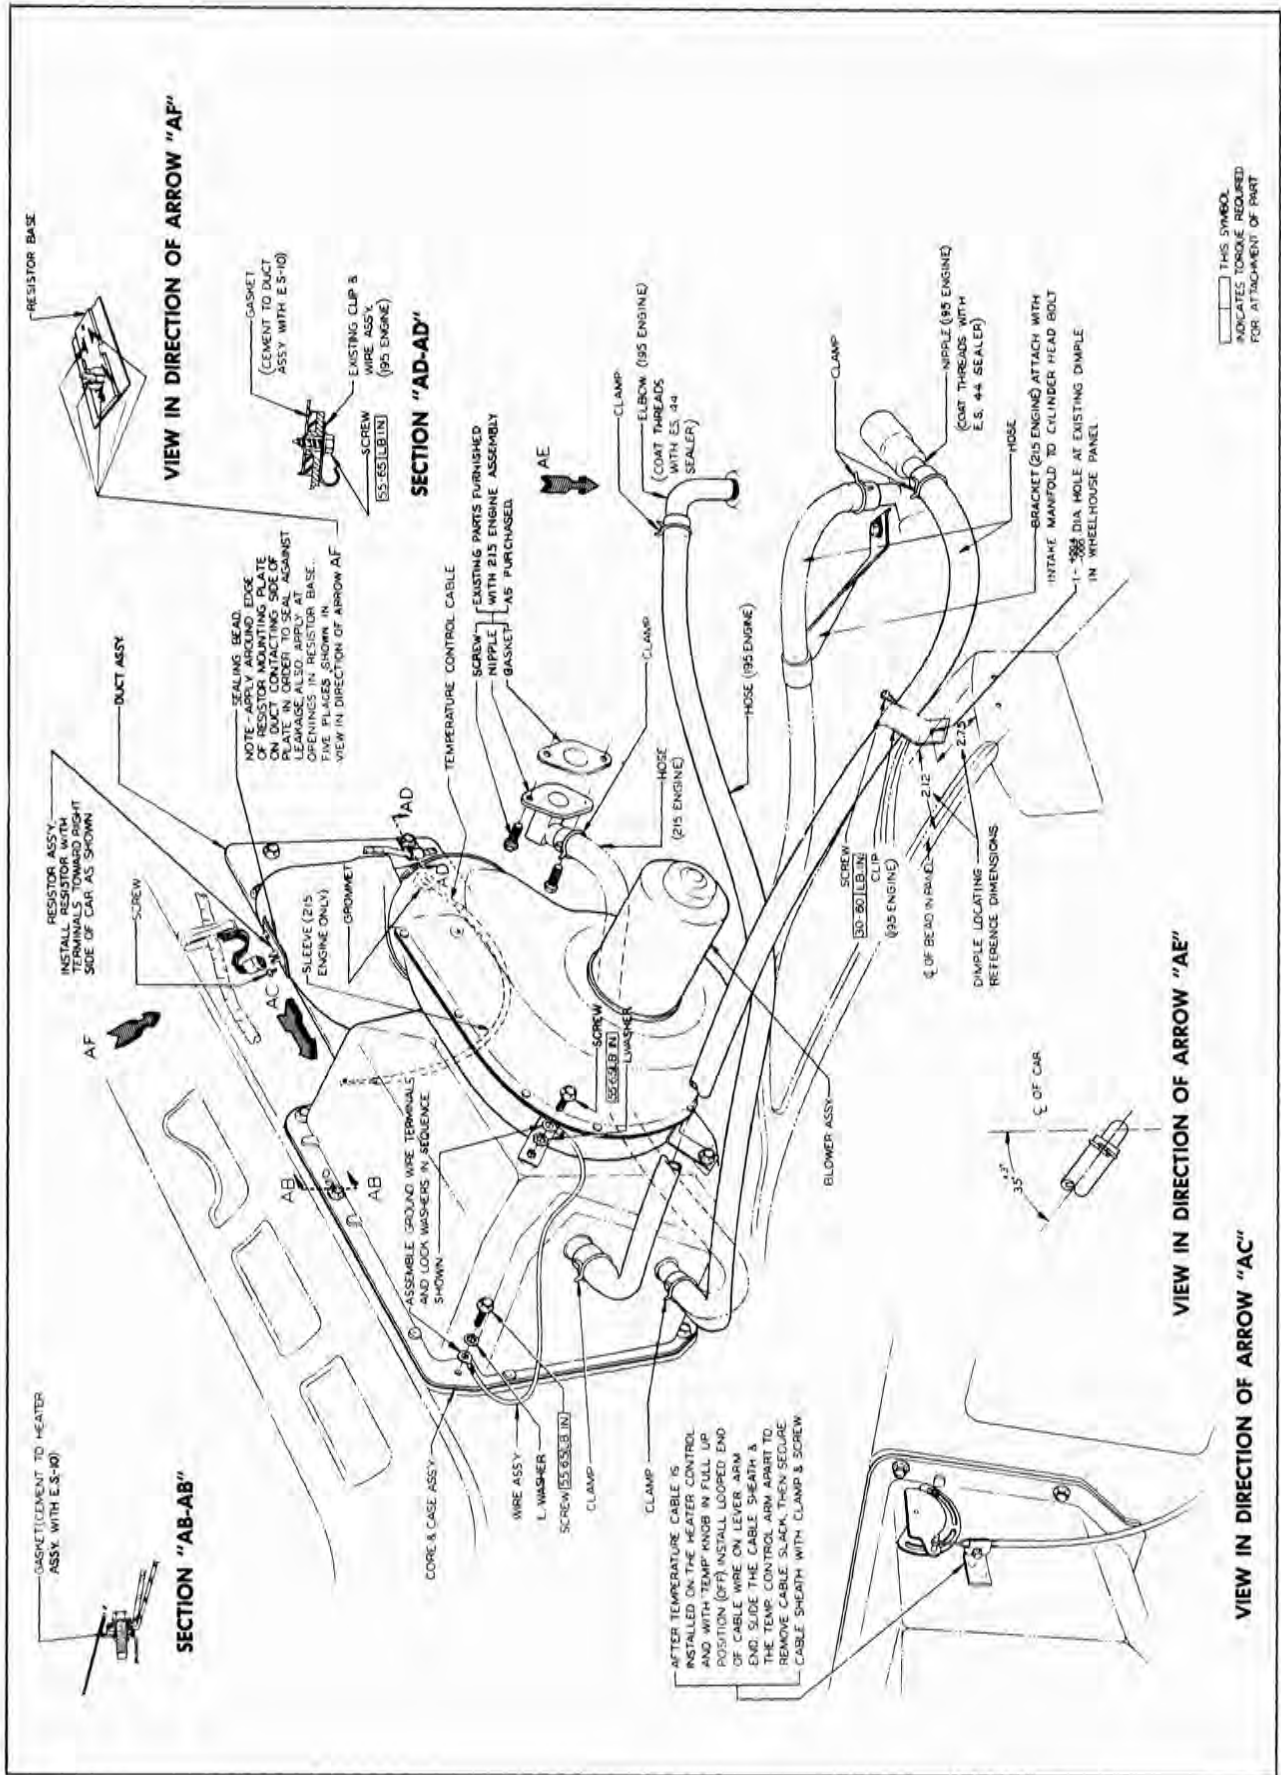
A-25 Reference Illustration—Engine Compartment Details
